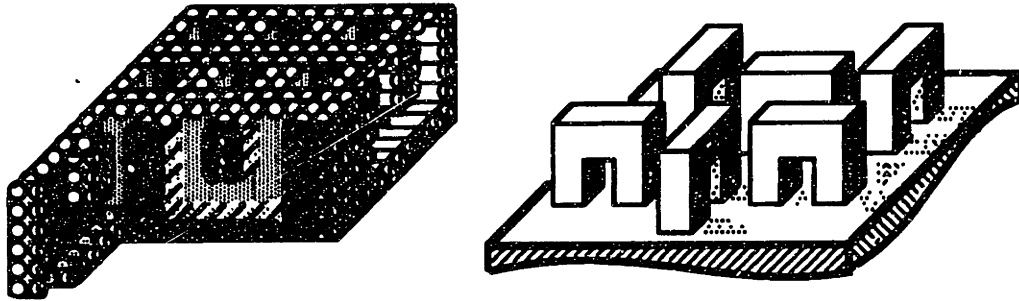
(left) Schematic of a mold surface texture showing the primitive size, (right) schematic of the resulting casting made from the mold on left.
